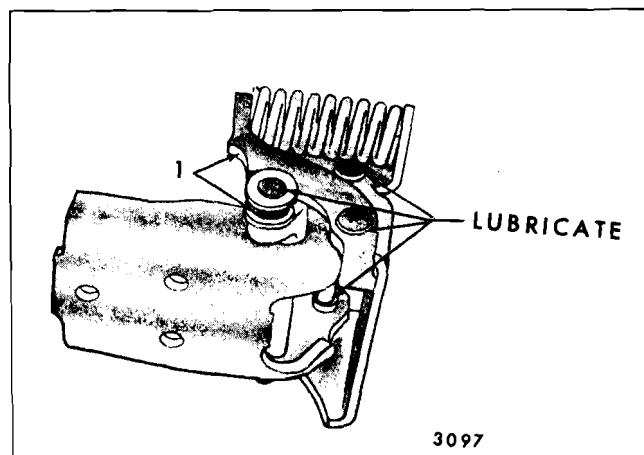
"A-B & C" Styles Front Door Hinge Lubrication
